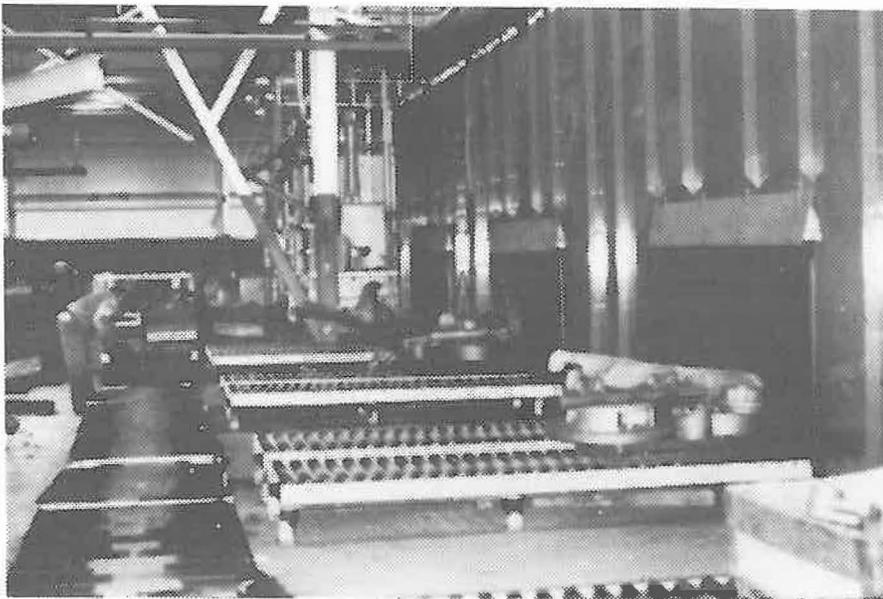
Large casting booths showing the inlet conveyors and castings ready to be processed.
